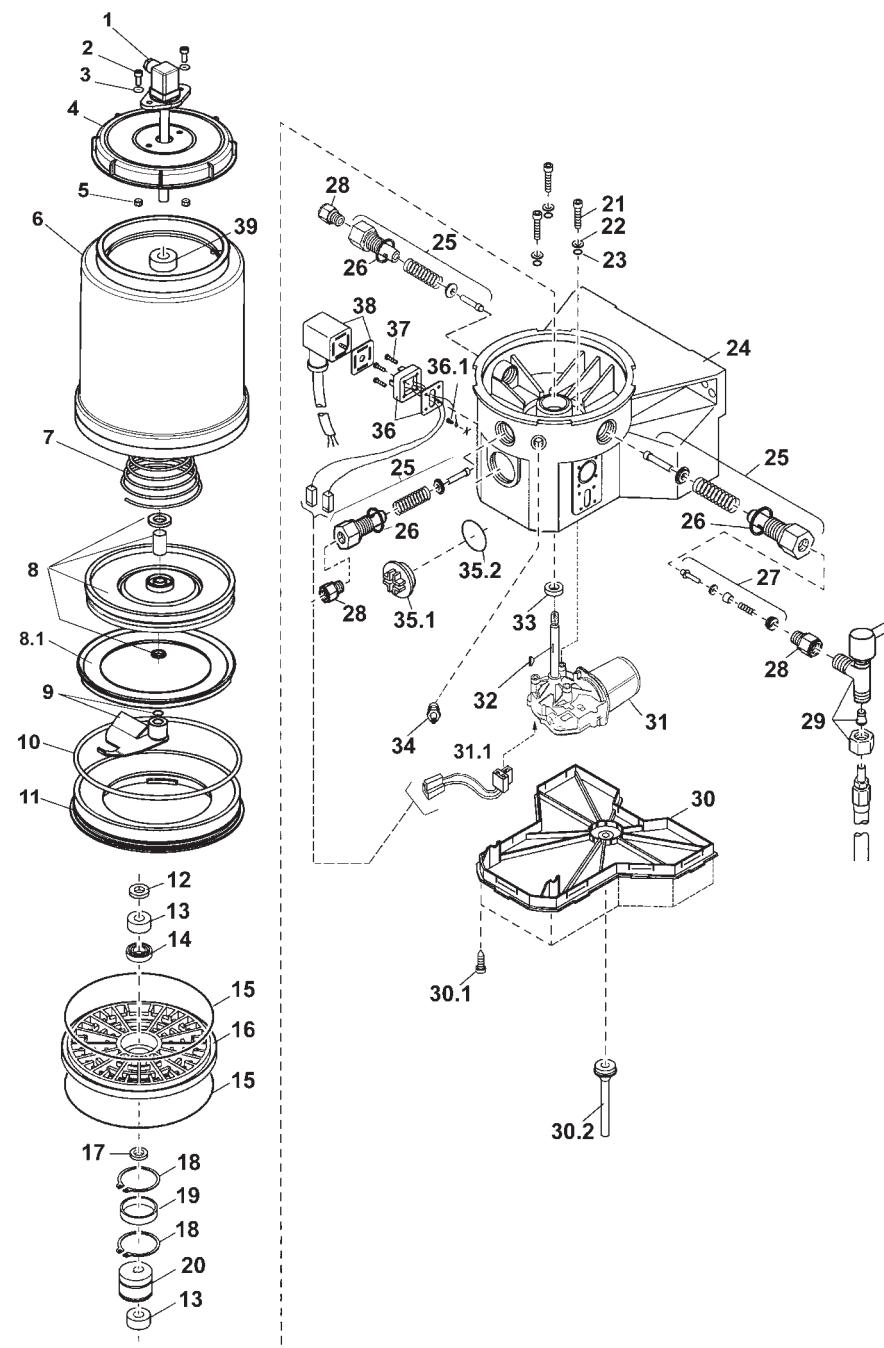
Explosion view for P 203-8XBF-3K-12/24-1A1.10
